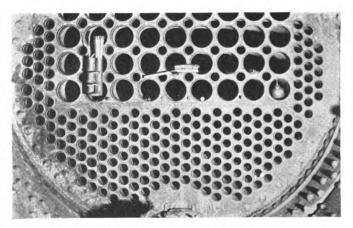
A 34-in. front flue sheet welded-in without removing rivets
